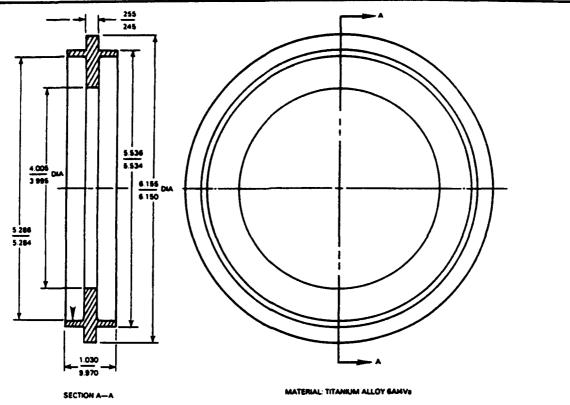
Joint ring stiffener B; critical pressure ≥18,000 psi.
